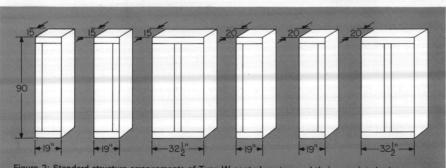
Standard structure arrangements of Type W control centers and their associated wireways provide greatest amount of control equipment in minimum floor space.
